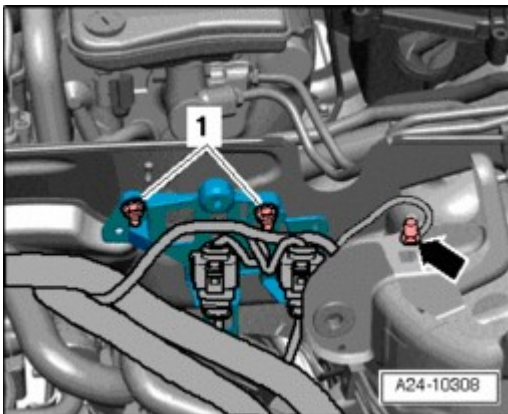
Identifying Vacuum Hose, Crankcase Breather, Wastegate Bypass Regulator Valve & Hose
